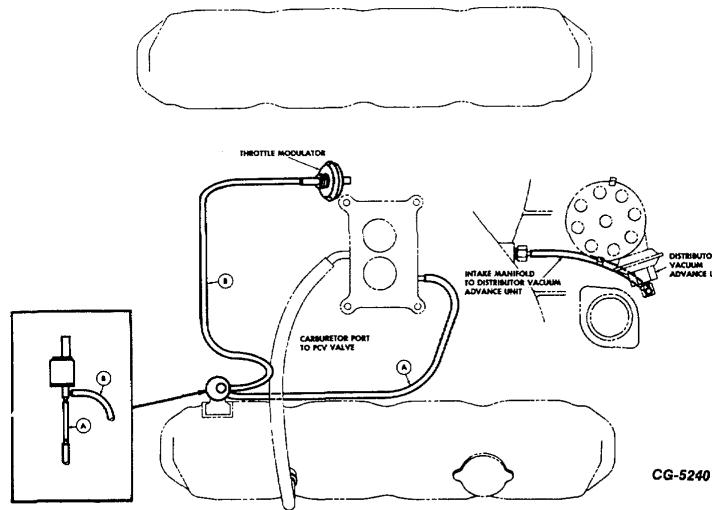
Vacuum Hose Locations on MV-404 Engine With 2300 EG Carburetor in Cargostar and S-Series Vehicles (Sold in Canada)
